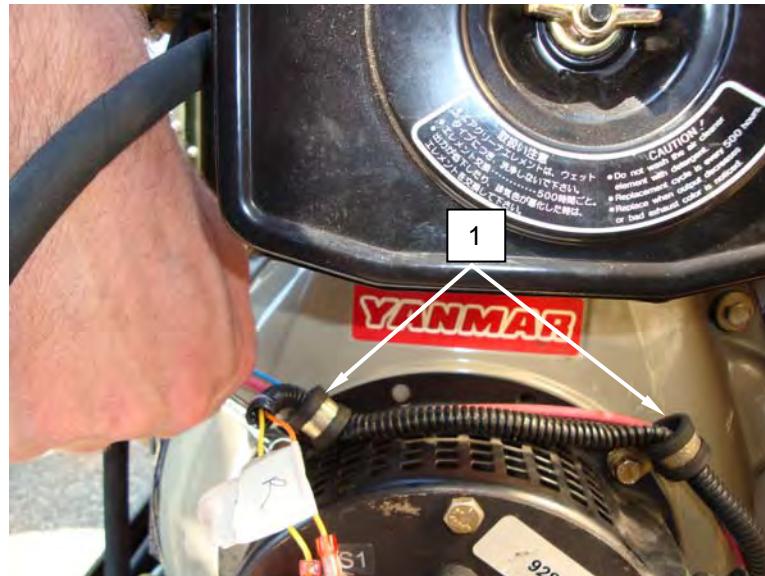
Remove Bolts Securing Clamps on Burner Pump Housing.
